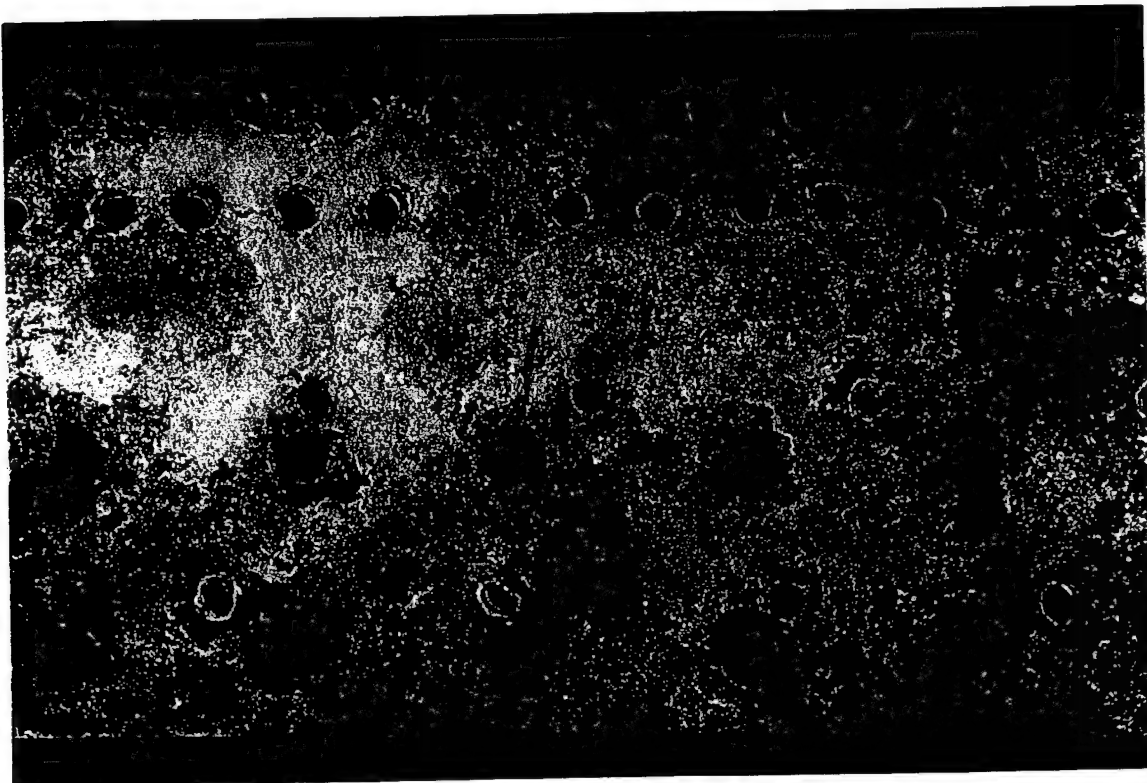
Close-Up Of Faying Surface Showing Extensive Corrosion.
